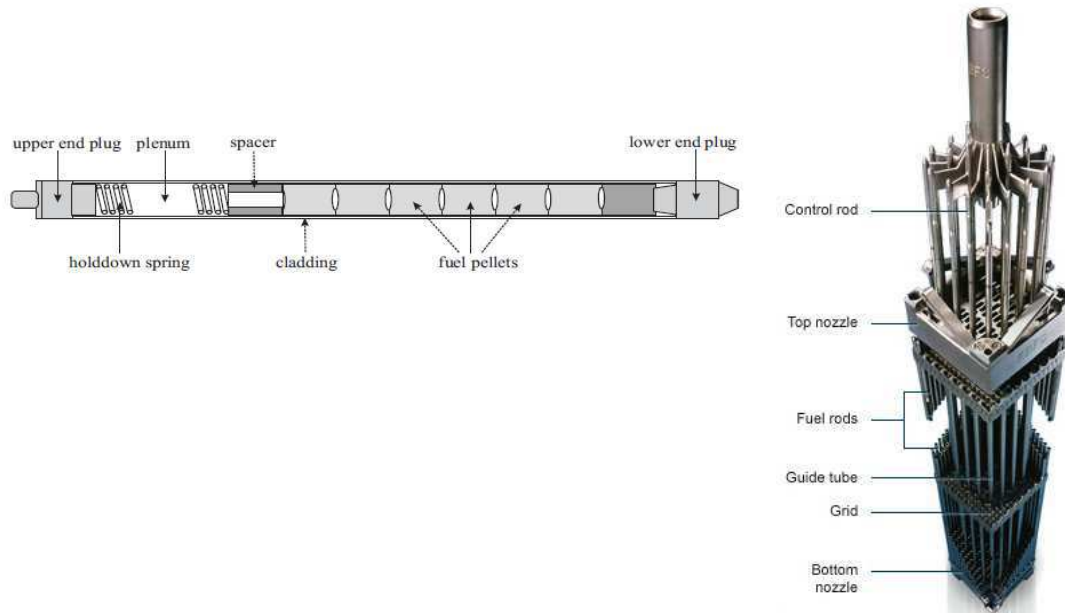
Schematic view of fuel rod and fuel rod assembly for Areva PWR fuel rods [1,7].
